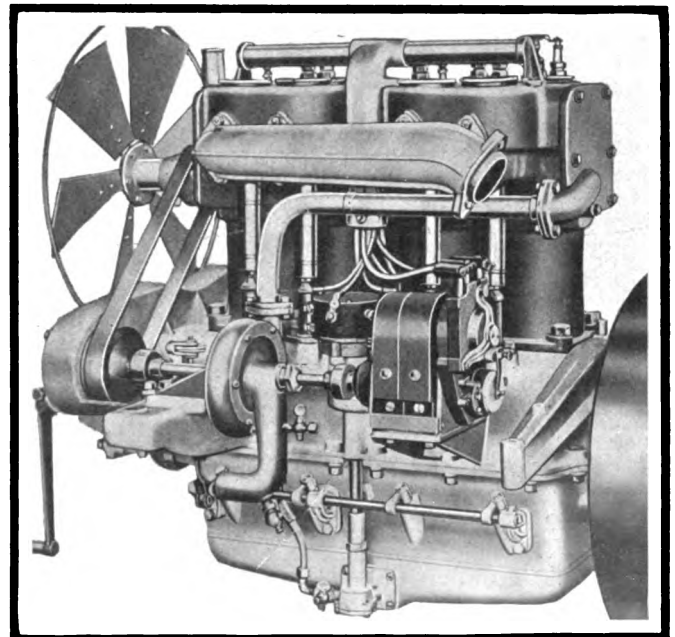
Exhaust side of 4-40, showing fan, pump and magneto mounting
